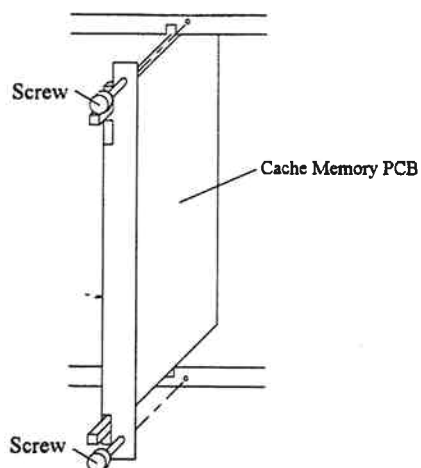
Removal of the Cache Memory PCB
